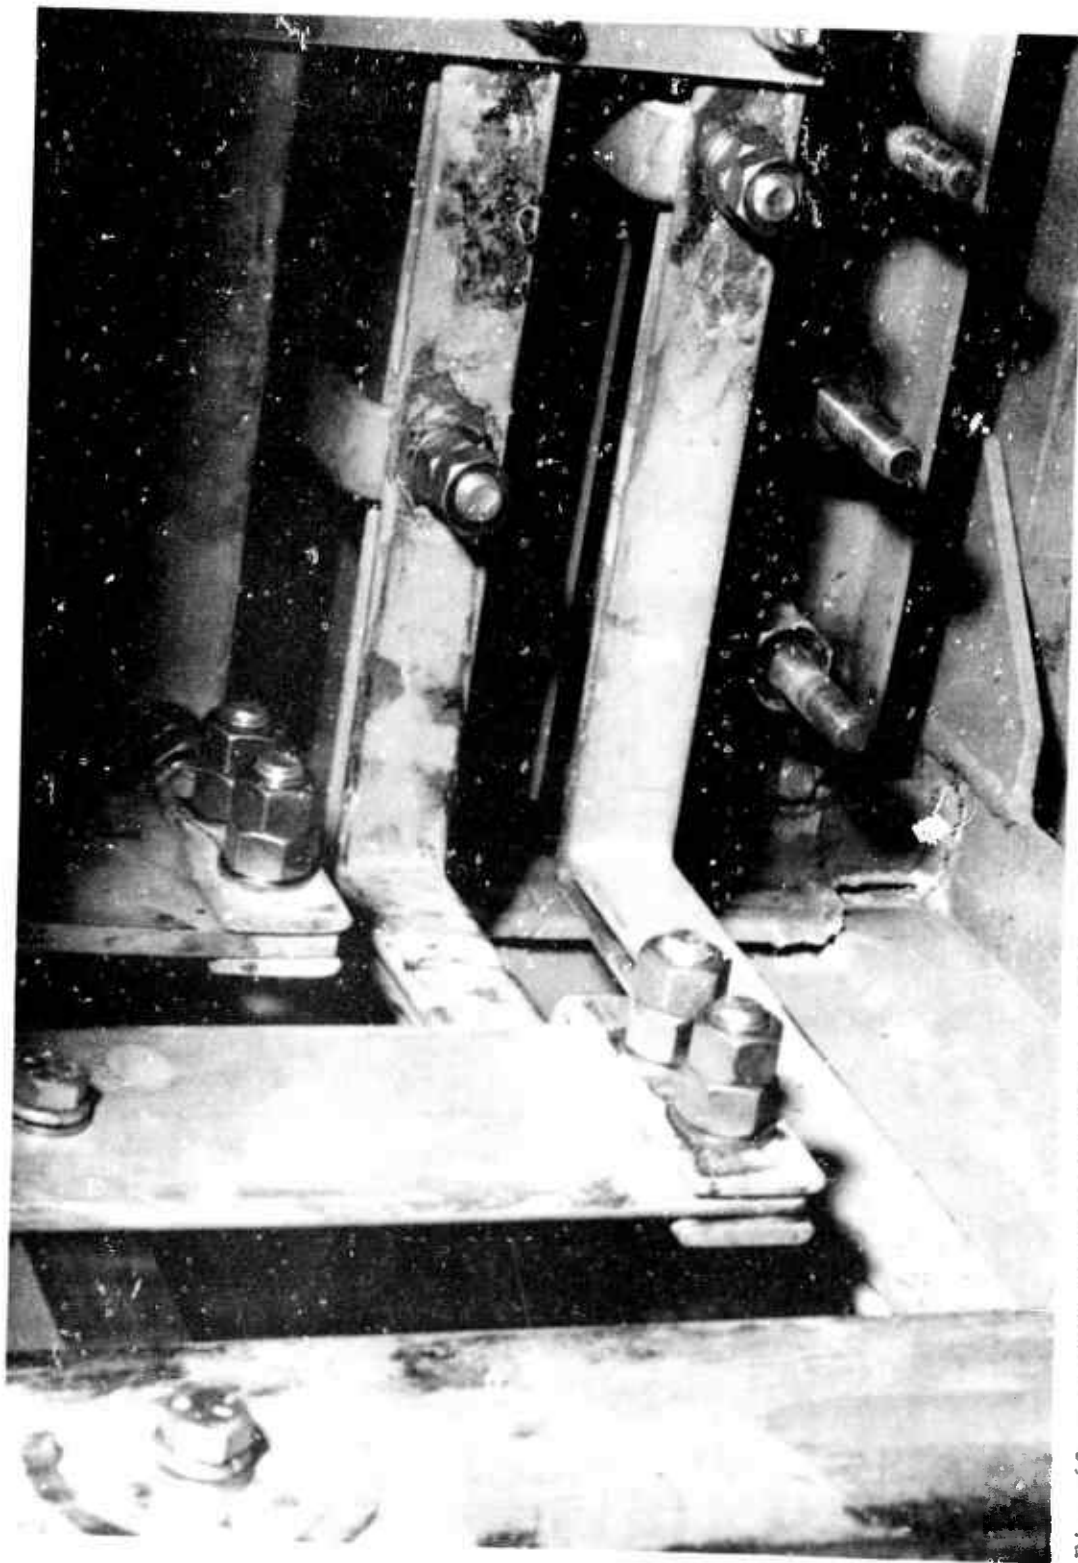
Damage from Shock Test - AQB Breaker Bay (Rear). Broken welds in frame base structure, inboard end.
